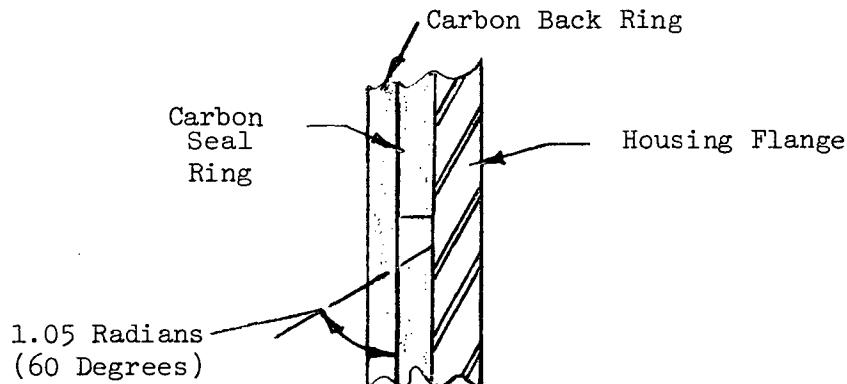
Gap Configuration of Primary Ring (View of Bore)
